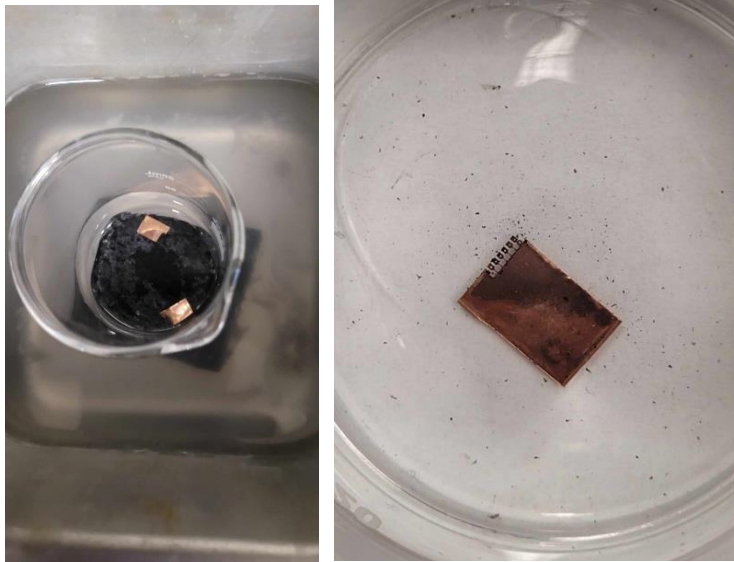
Sonification cleaning of fs-laser machined copper micro-tensile specimens.
